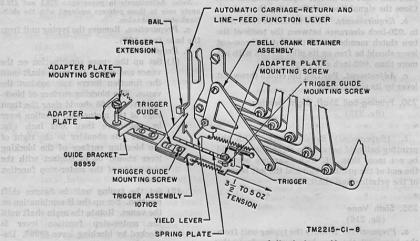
(Added) Automatic carriage-return and line-feed assembly.
